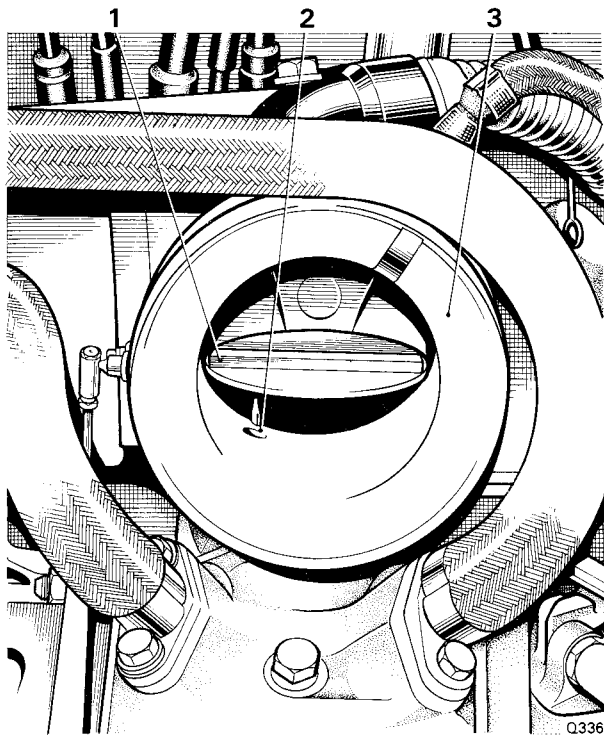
HOT IDLE MIXTURE COMPENSATOR FEED
